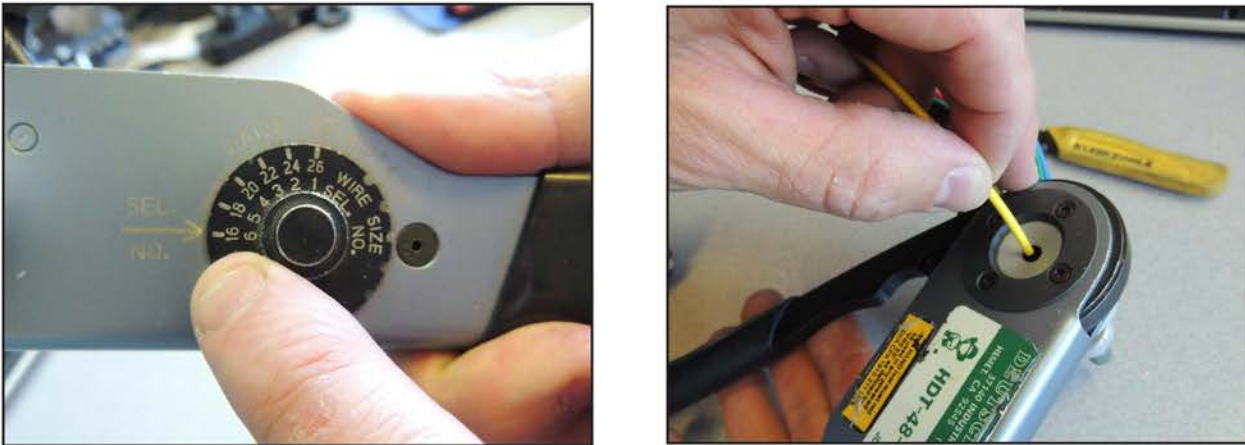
Use a Deutsch crimper to crimp the Deutsch socket onto the wire.
